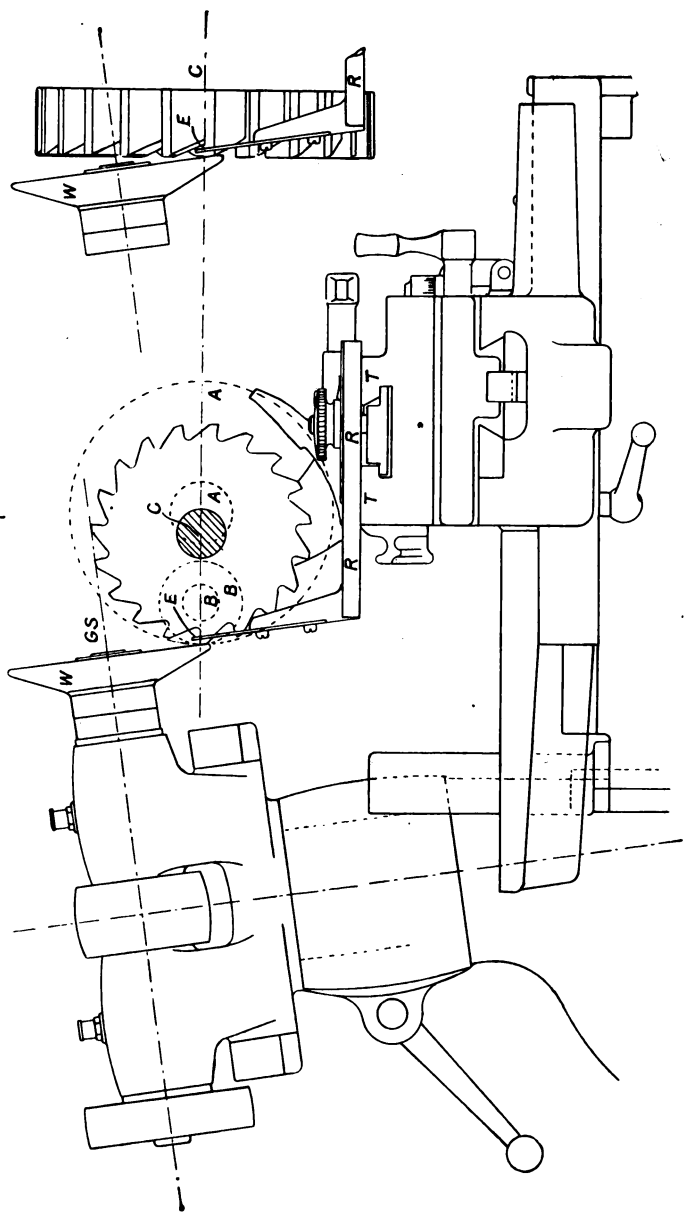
"Guest" Grinder Sharpening on Edge of Wheel.
